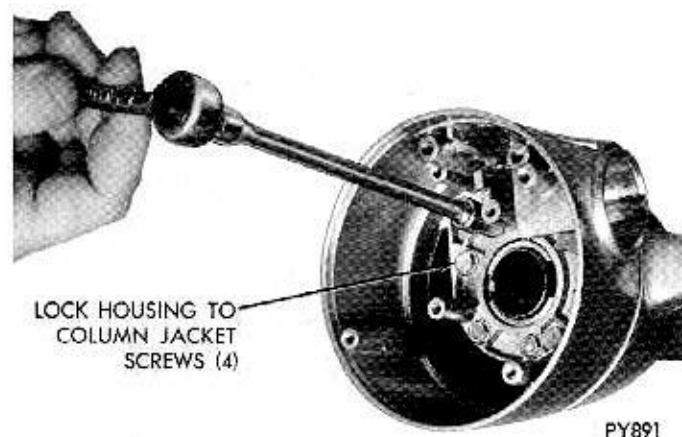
Lock Housing to Column Jacket, Retaining Screws
